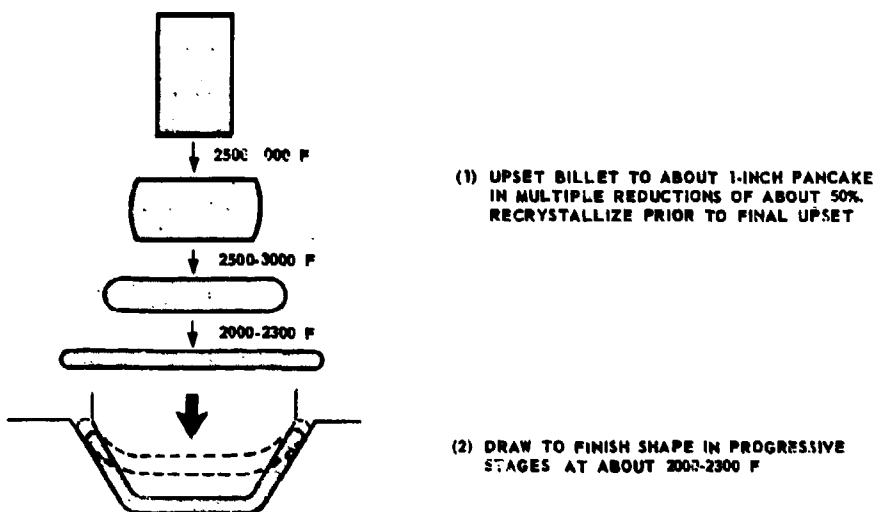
PROBABLE DIE STAGES IN FORGING PRESSED AND SINTERED TUNGSTEN FOR TYPE C FORGING DESIGN
